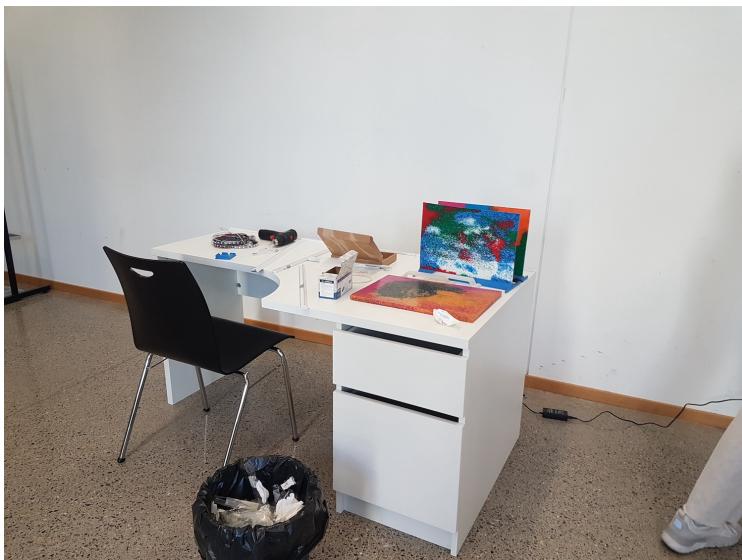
Manufacturing of the recycled parts (PC support, adjustable folder separation and drawer handler)
